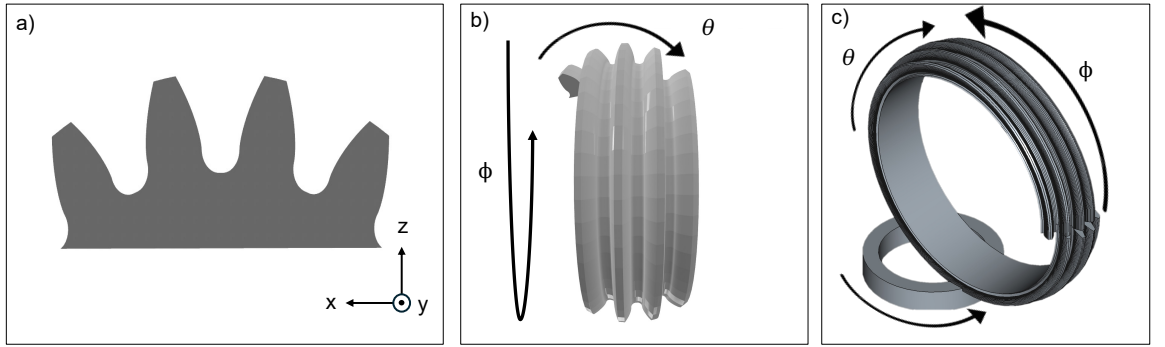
(a) Four-tooth involute profile in the normal section. (b) Mapping of the profile along the circular tool path. (c) Resulting three-dimensional tool geometry with helical cutting edges.
